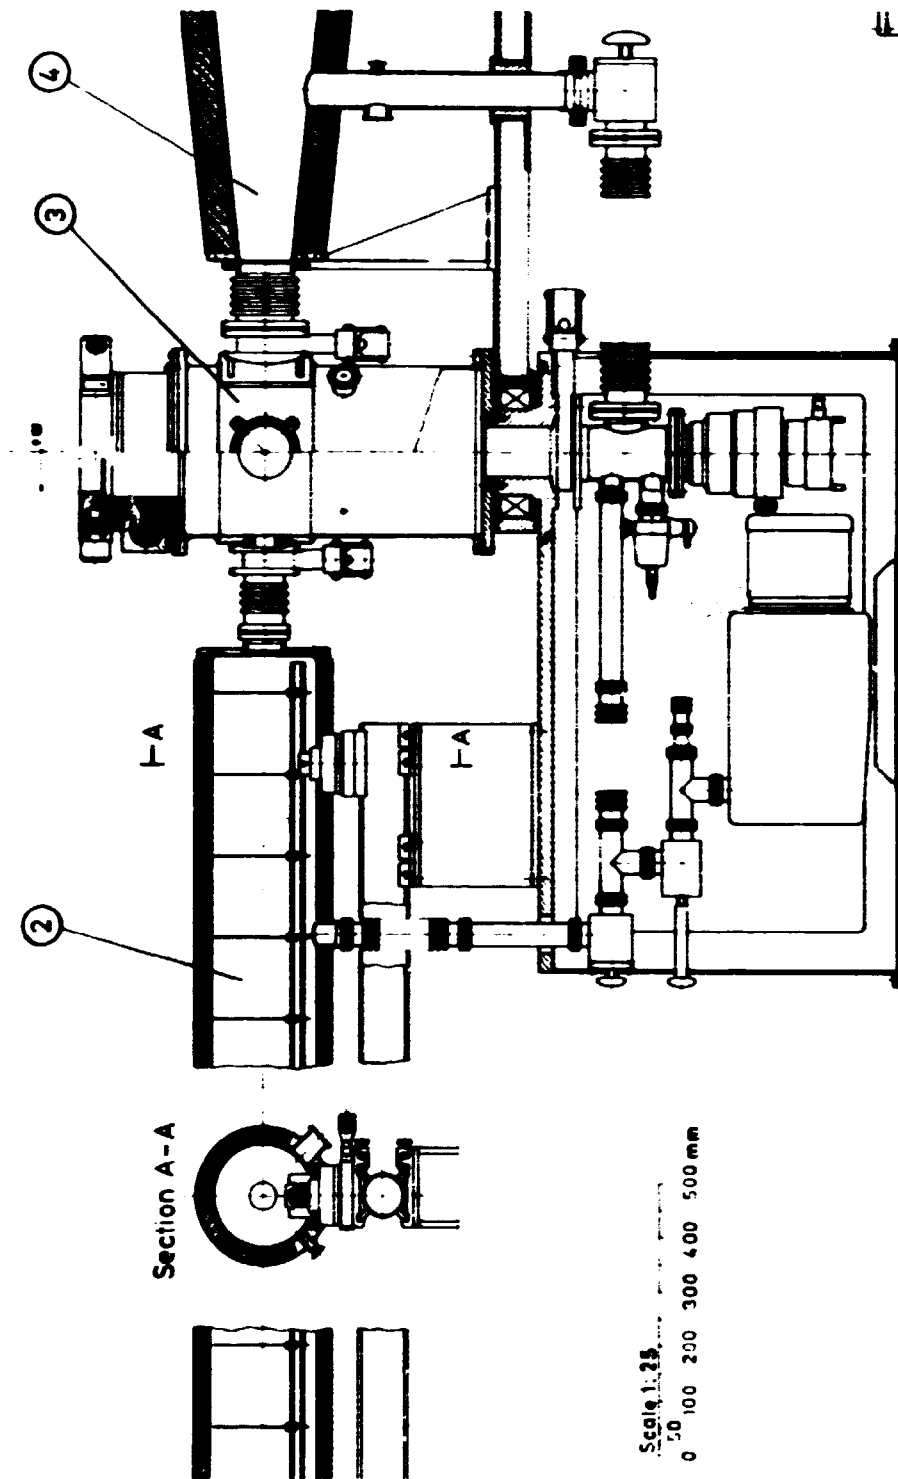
Detailed drawing of SANS. (2) Collimator, (3) sample chamber and (4) flight tube.
